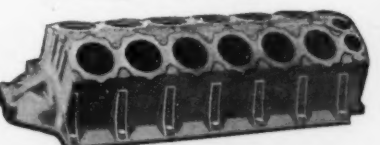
Quantity production of Liberty Motors would have been close to impossible if machine moulding had not produced thousands of uniform castings of this quality.
